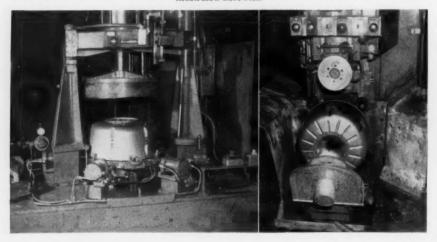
This welder folds up the sides of the shell from the flat and seam welds the back panel in place with two longitudinal seam welds.
